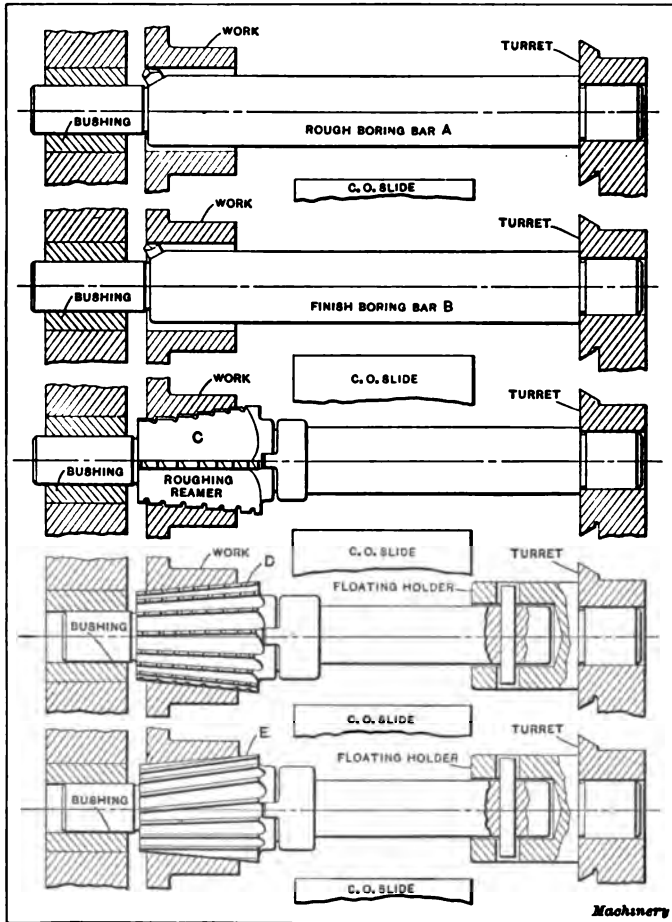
Typical Boring Tools and Reamers for Taper Holes
